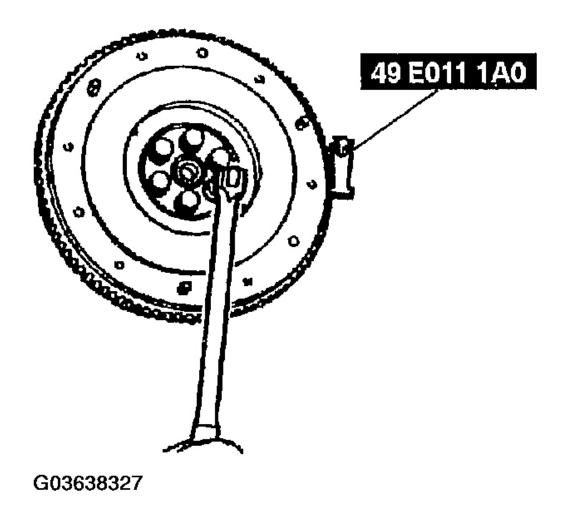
Removing Flywheel Courtesy of MAZDA MOTORS CORP.
